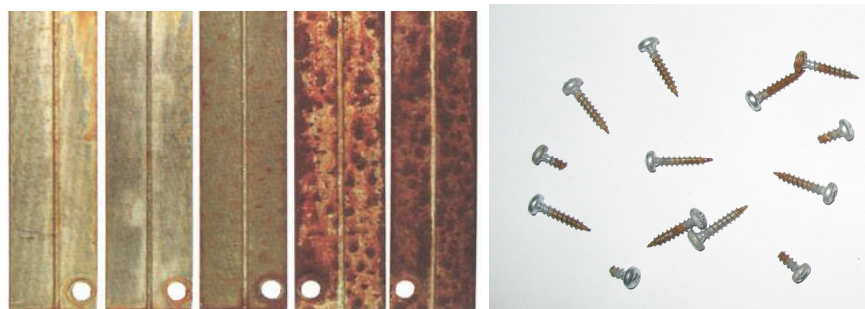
Examples of corrosion on hinge's parts with different coatings (left); on screws (right)
